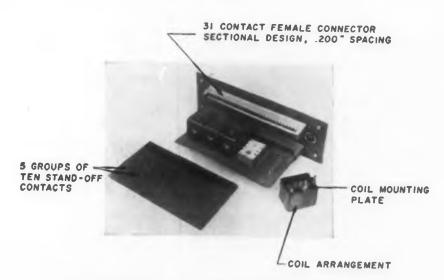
Computer unit is completely modularized. Printed circuit wiring is on the under side of mother board. Component modules are mounted in the insert board.
